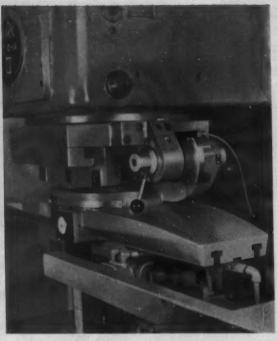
Compact attachment applied to gear-shaving machine for crown, taper, and fine lead adjustment
